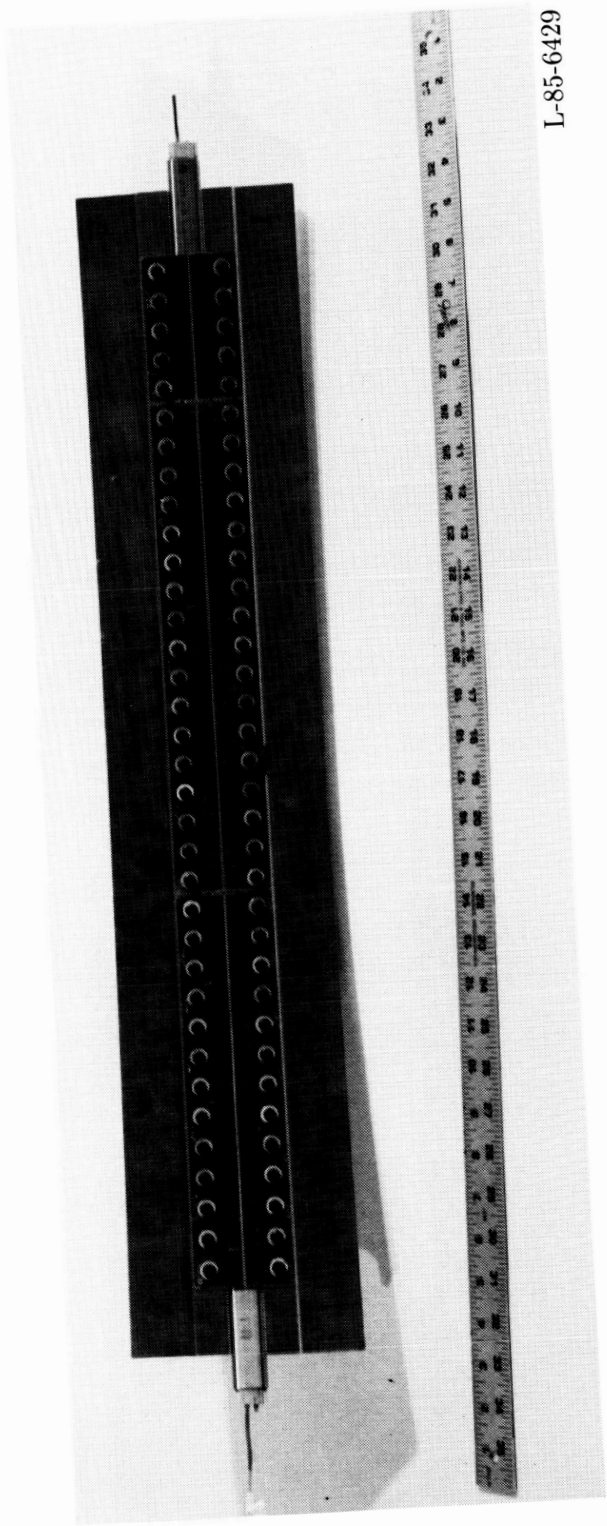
Rigid test fixture. Linear dimensions are in inches.
